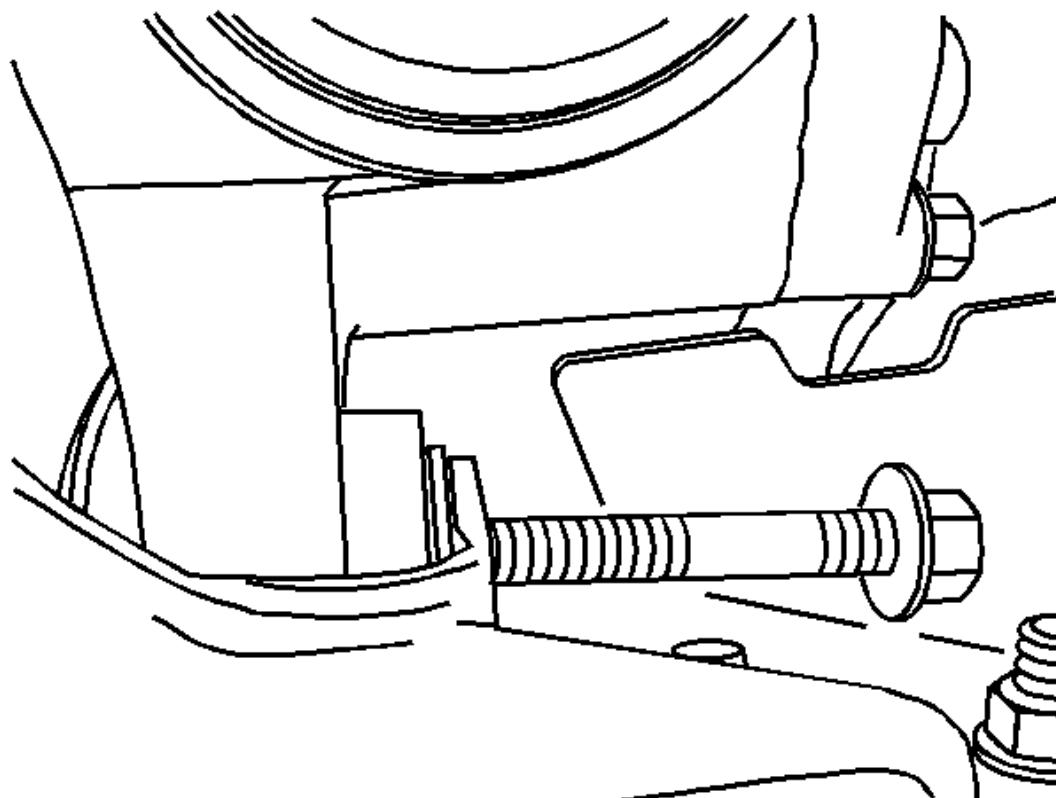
View Of Differential Carrier Lower Mounting Bolt
